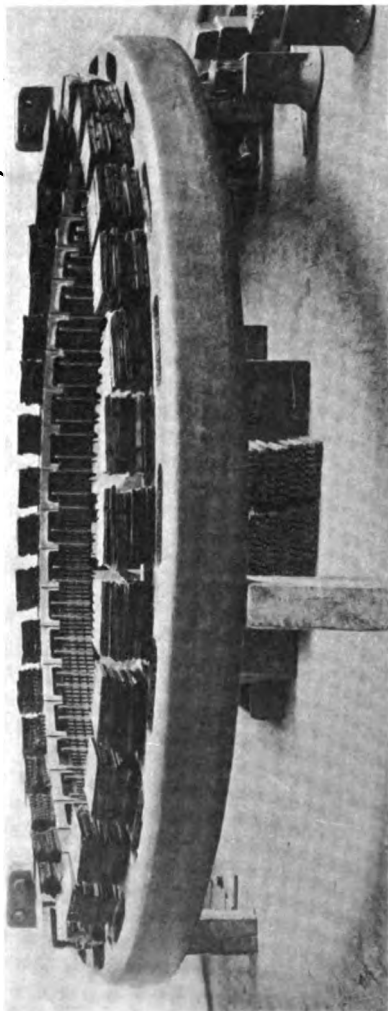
Current Generator, View Showing Laminations Partially Assembled.
